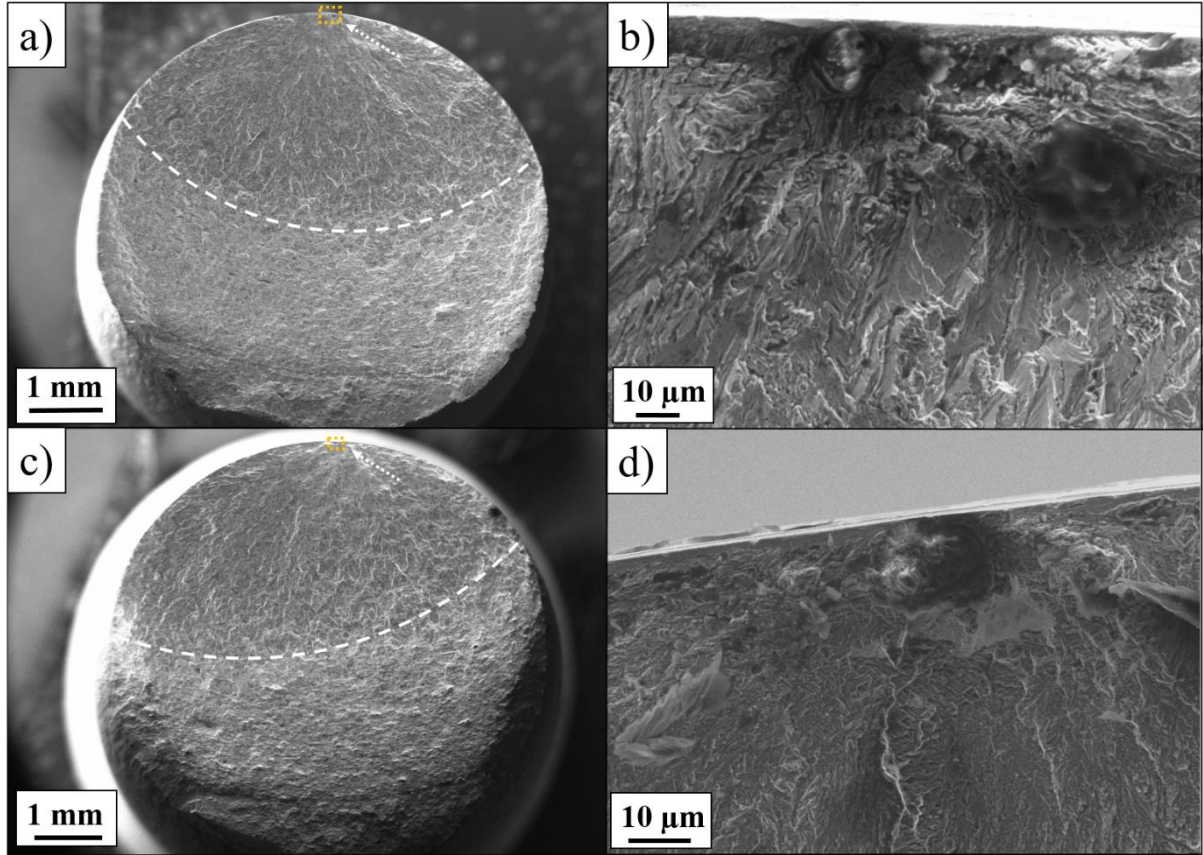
Fracture surface and close-up on the critical defect for a) b) Sample L-4 and c) d) Sample L-2
